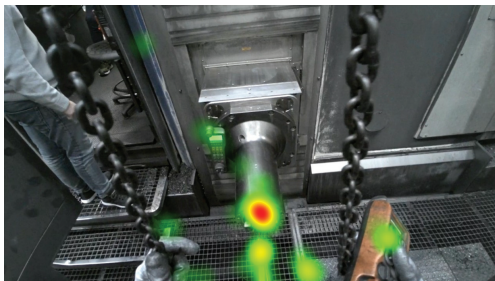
Heat map reflecting more relevant areas for operator when installing boring head in milling machine.
